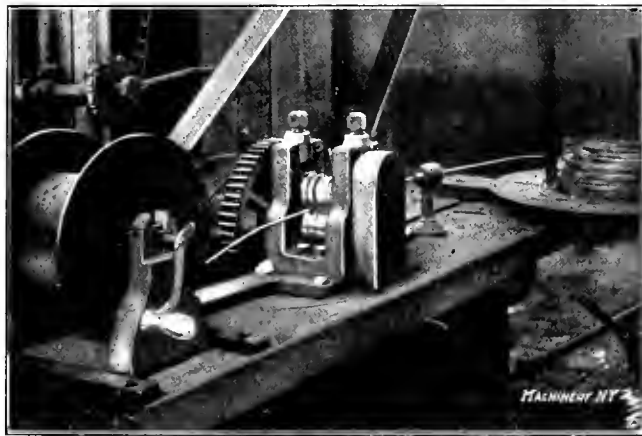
Rolls for Flattening end Sizing Copper Wire for Gaskets
